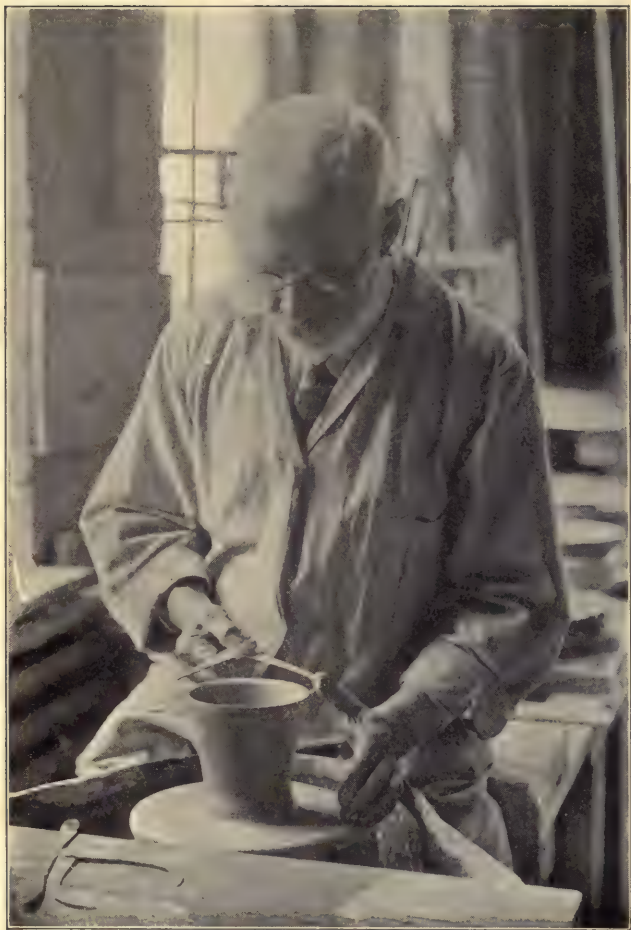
PLATE XIV. MAKING LARGE PIECES. THE FIRST SECTION.
